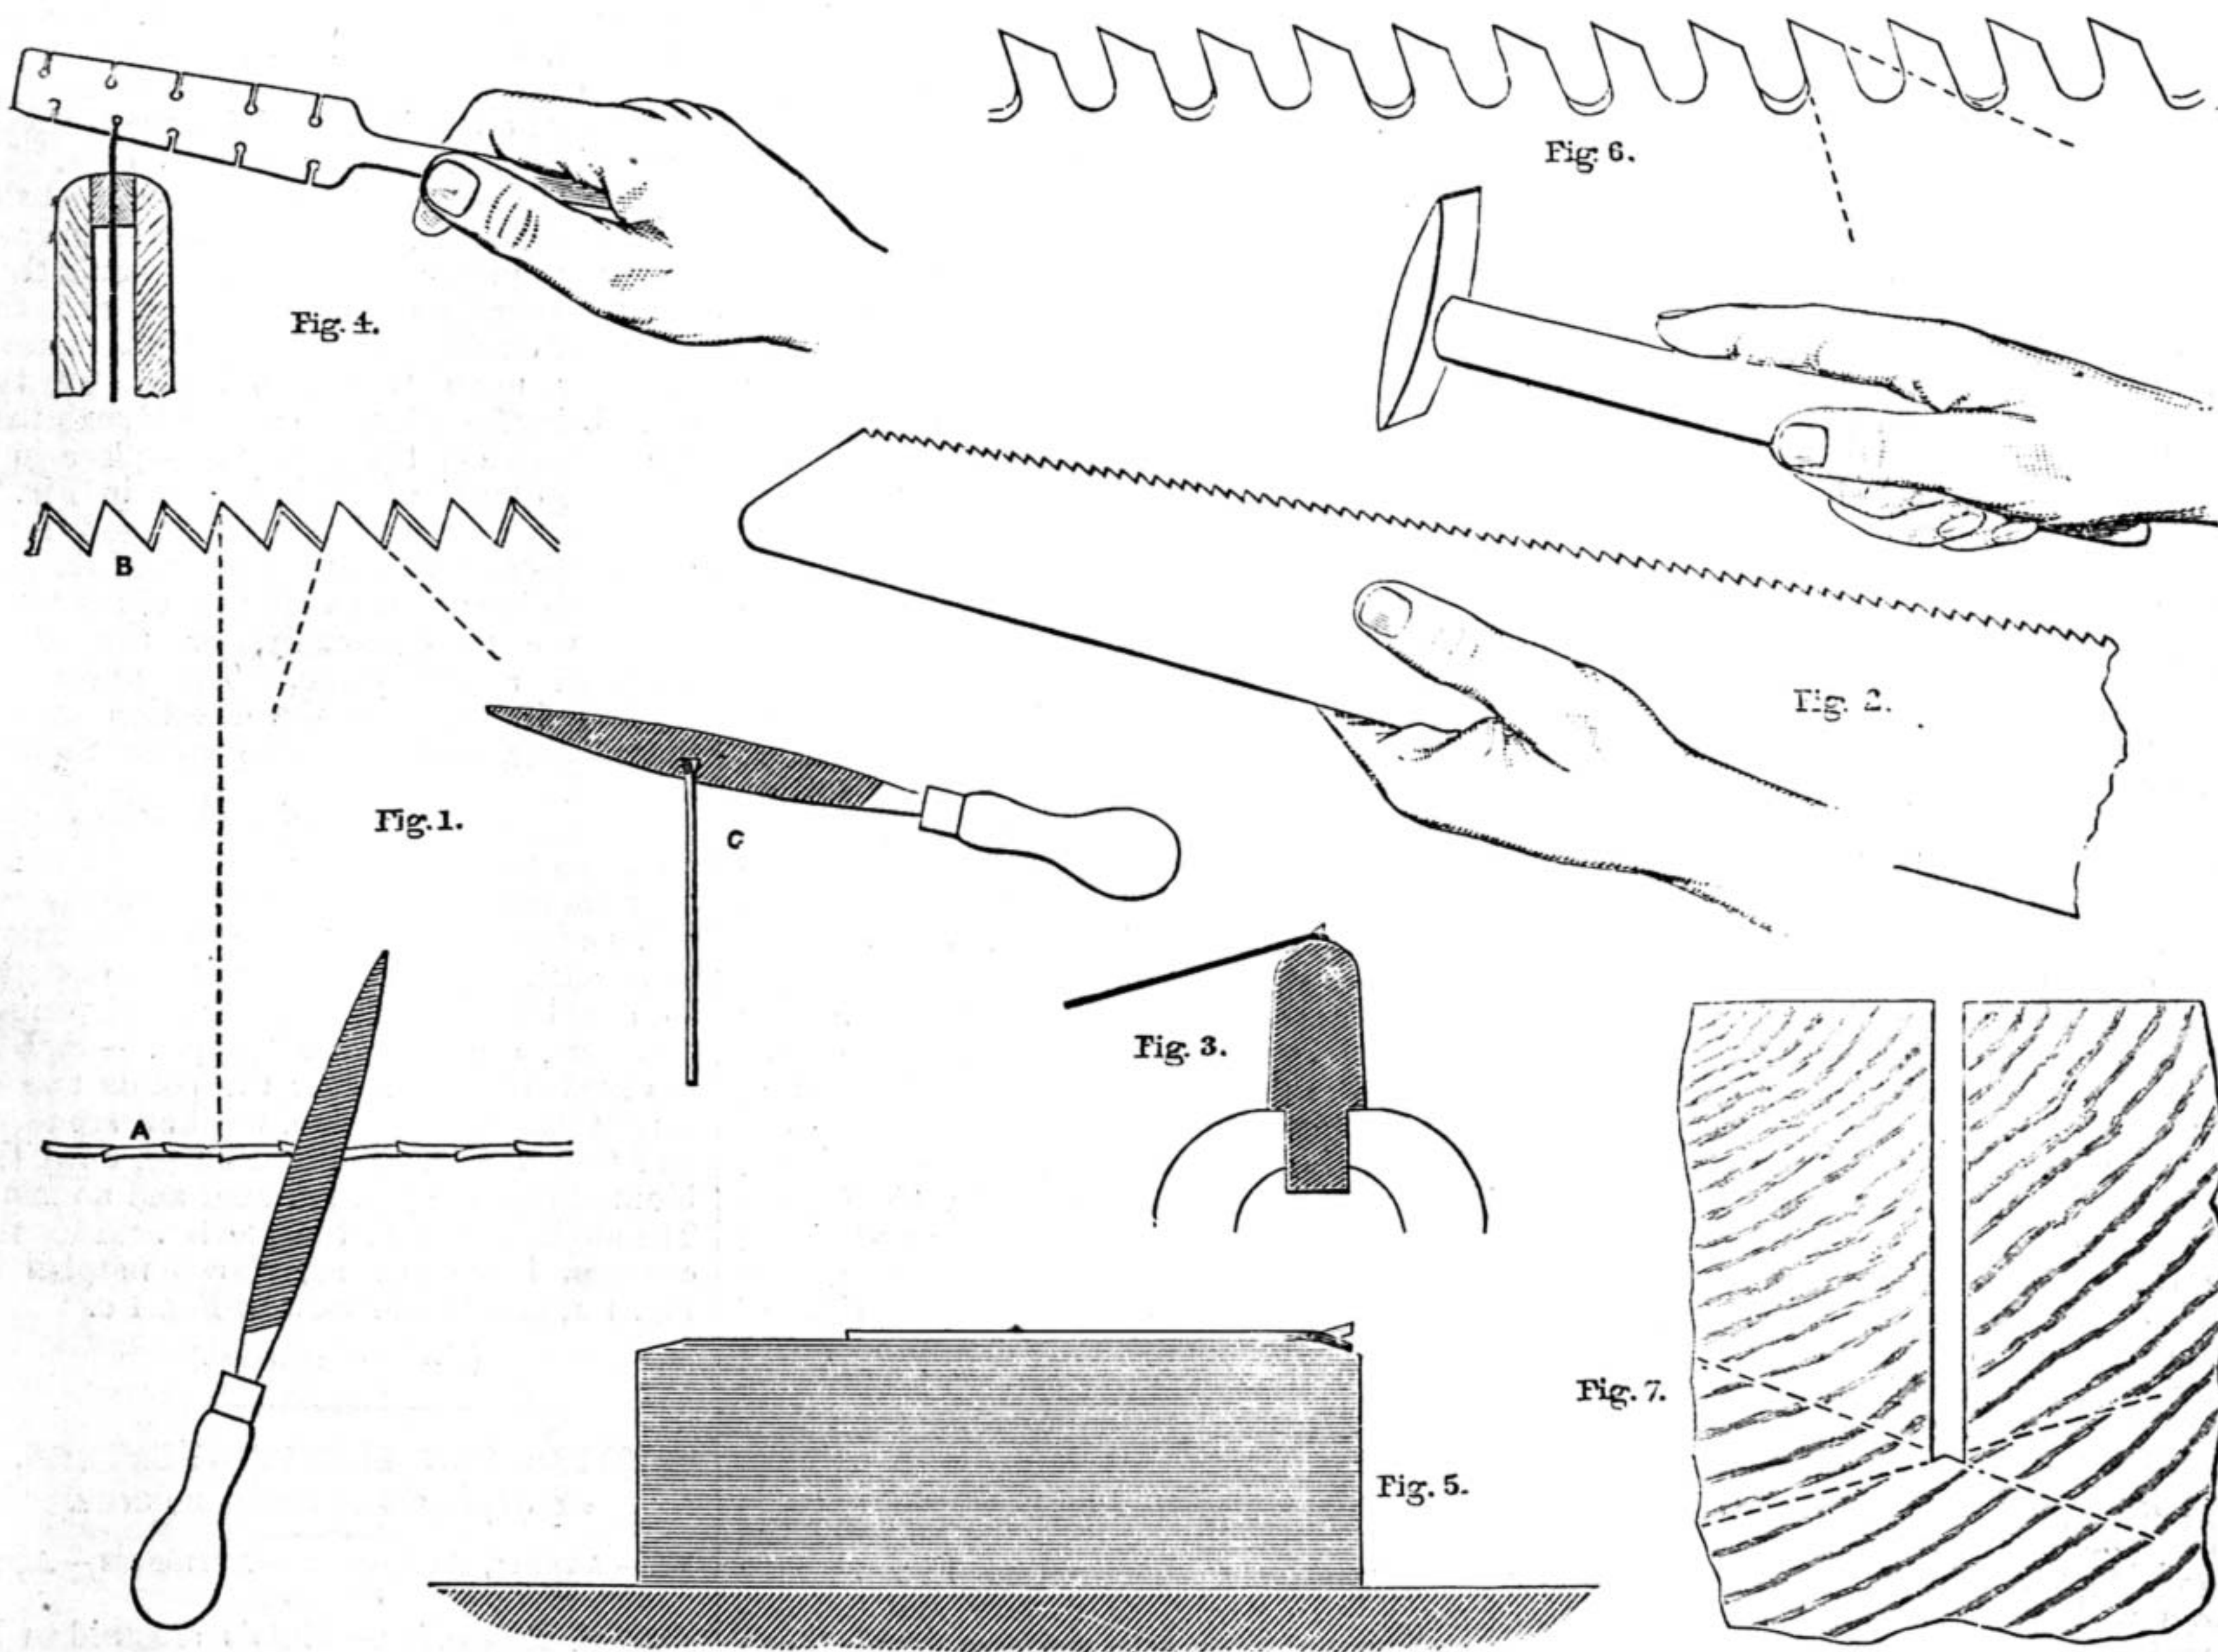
Hand-saw Teeth. Fig. 2.—Method of Setting on a Block. Fig. 3.—Section of Setting Block. Fig. 4.—Method of Using Plyer Set. Fig. 5.—Method of Setting by Chamfered Edge. Fig. 6.—Teeth with much "Rake," used for Cutting Soft Woods. Fig. 7.—Saw Kerf, Enlarged.
